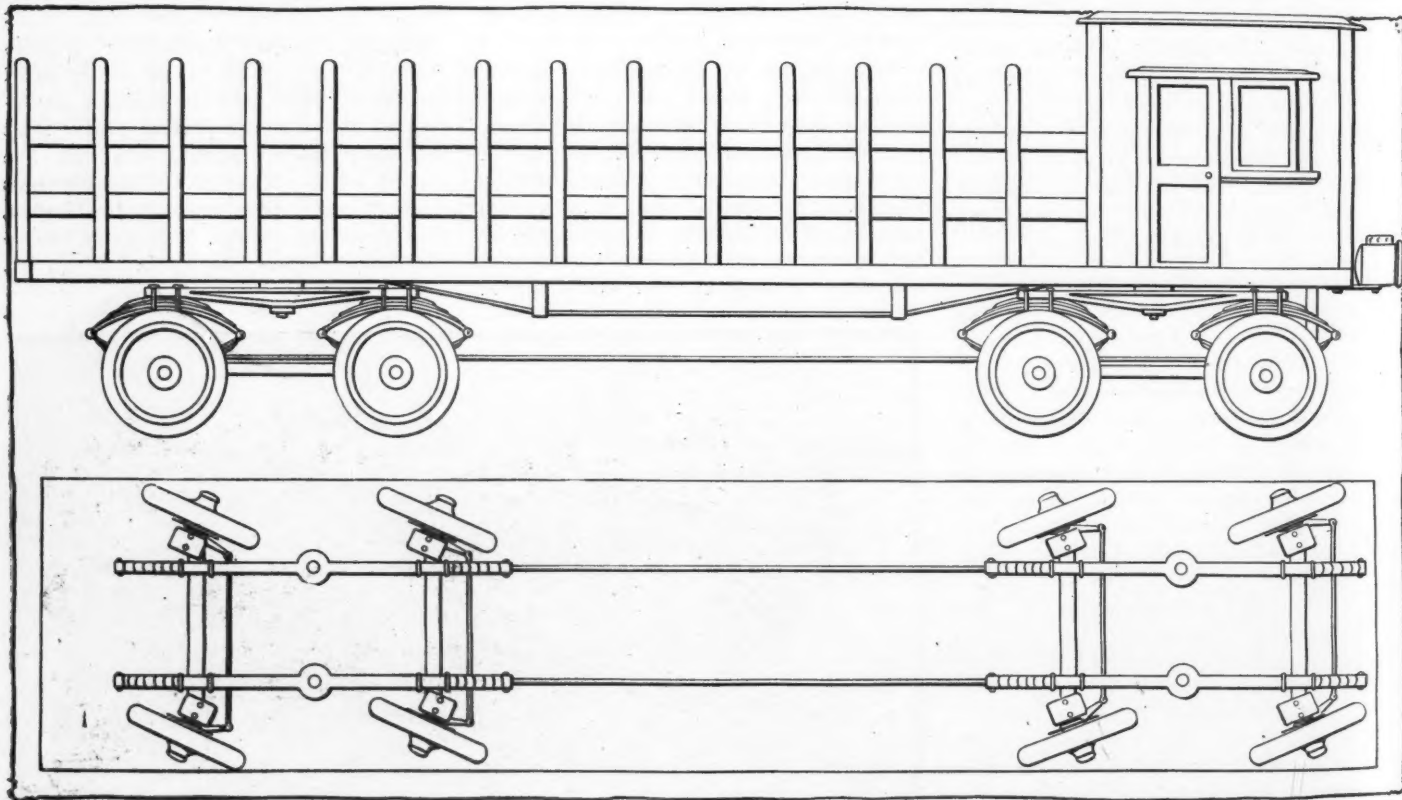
SIDE VIEW OF DAVENPORT'S 8-WHEEL DRIVE APPLIED TO TRUCK. BELOW IS UNDER VIEW SHOWING INDEPENDENT STEERING OF FRONT AND REAR WHEELS
